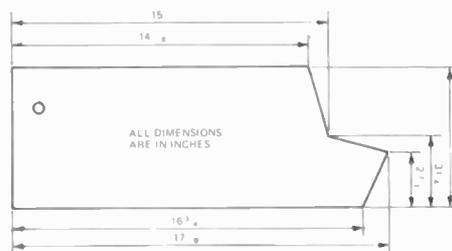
Dimensions for fixing the hinge and rear panel to the side panel.
